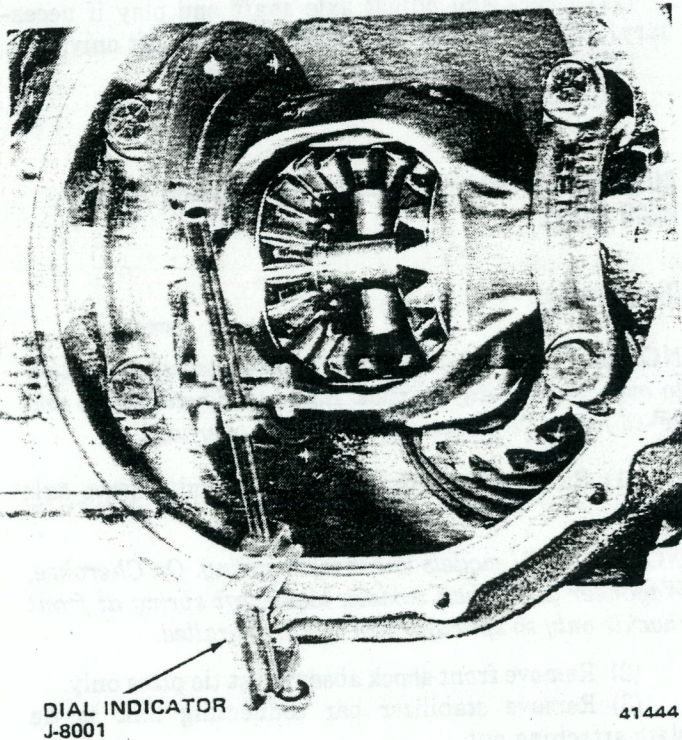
F-42 Checking Ring Gear Mounting Surface of Case for Runout
